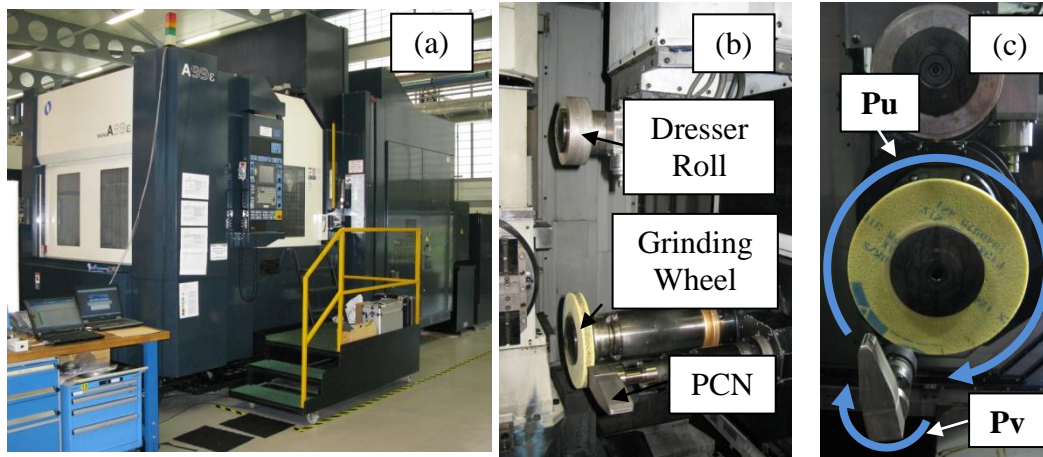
Makino A99 Machine Tool; (a) Image of Machine Exterior, (b) Internal machine envelope including Grinding Wheel, Dresser Roll and Pressure Cutting fluid Nozzle (PCN) Setup (c) Pressure Cutting fluid Nozzle axis setup and available movement.
